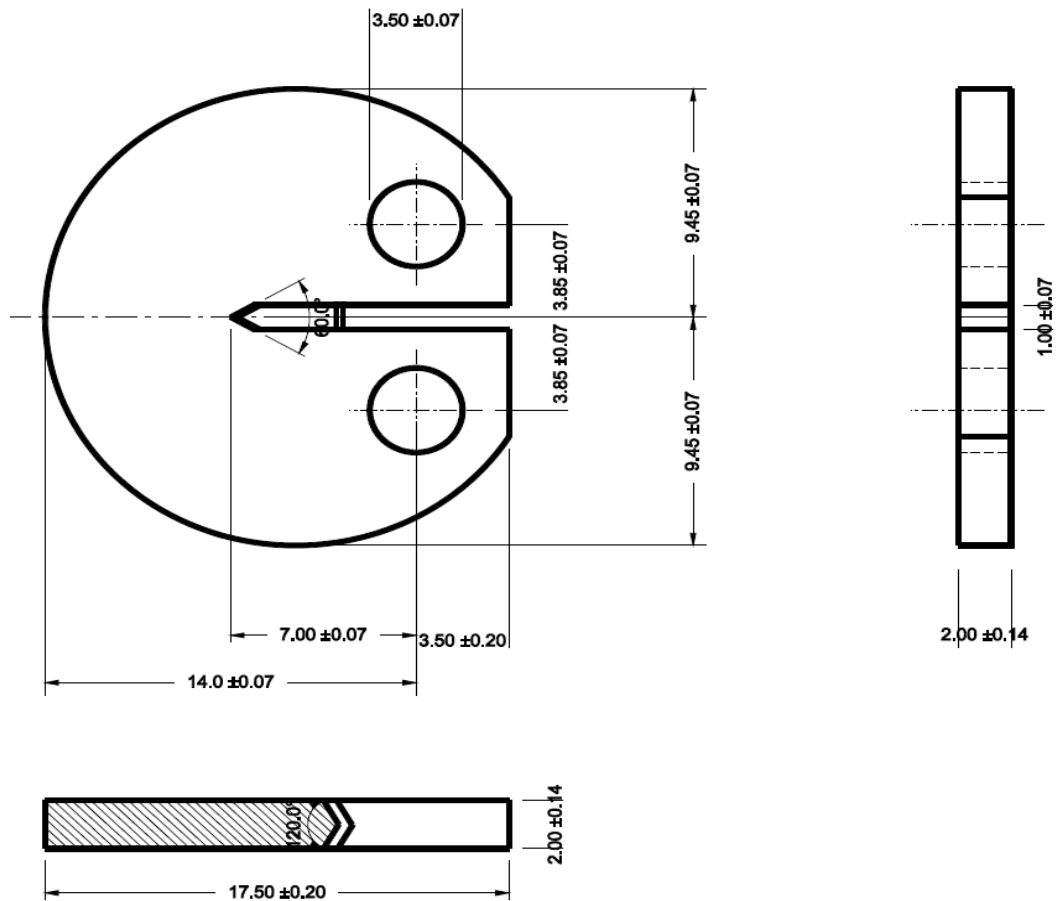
Disk shaped compact tension specimen geometry employed by Achilles[19].
